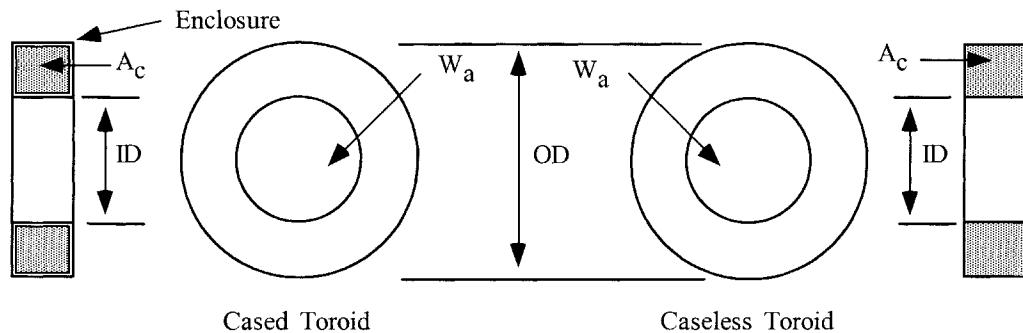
Tape Toroidal Core Dimensional Outline.
